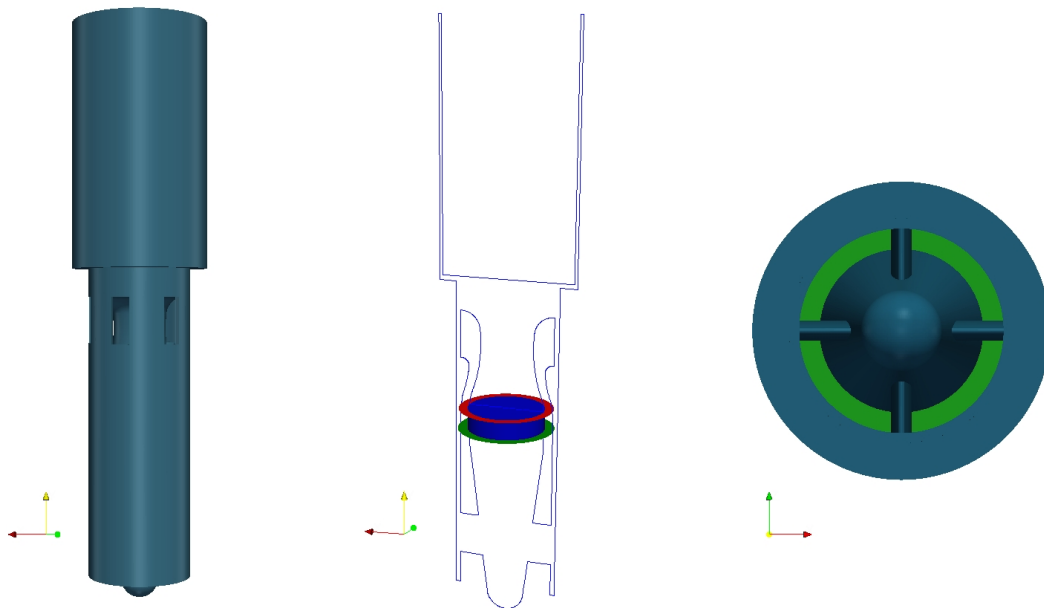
Pump inlet (red) and outlet (green) surfaces
